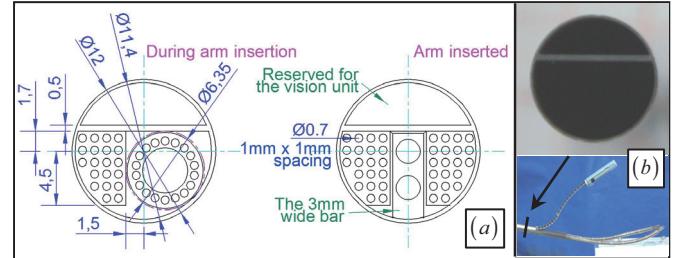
Layout of the cross section: (a) CAD drawing and (b) prototype
